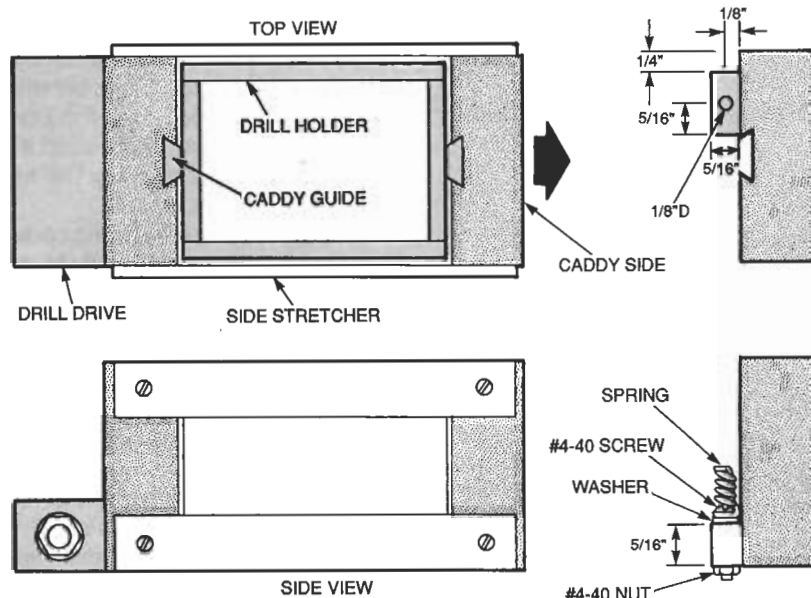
The drill-caddy assembly contains all the components shown in Fig. 12 and Fig. 13.
